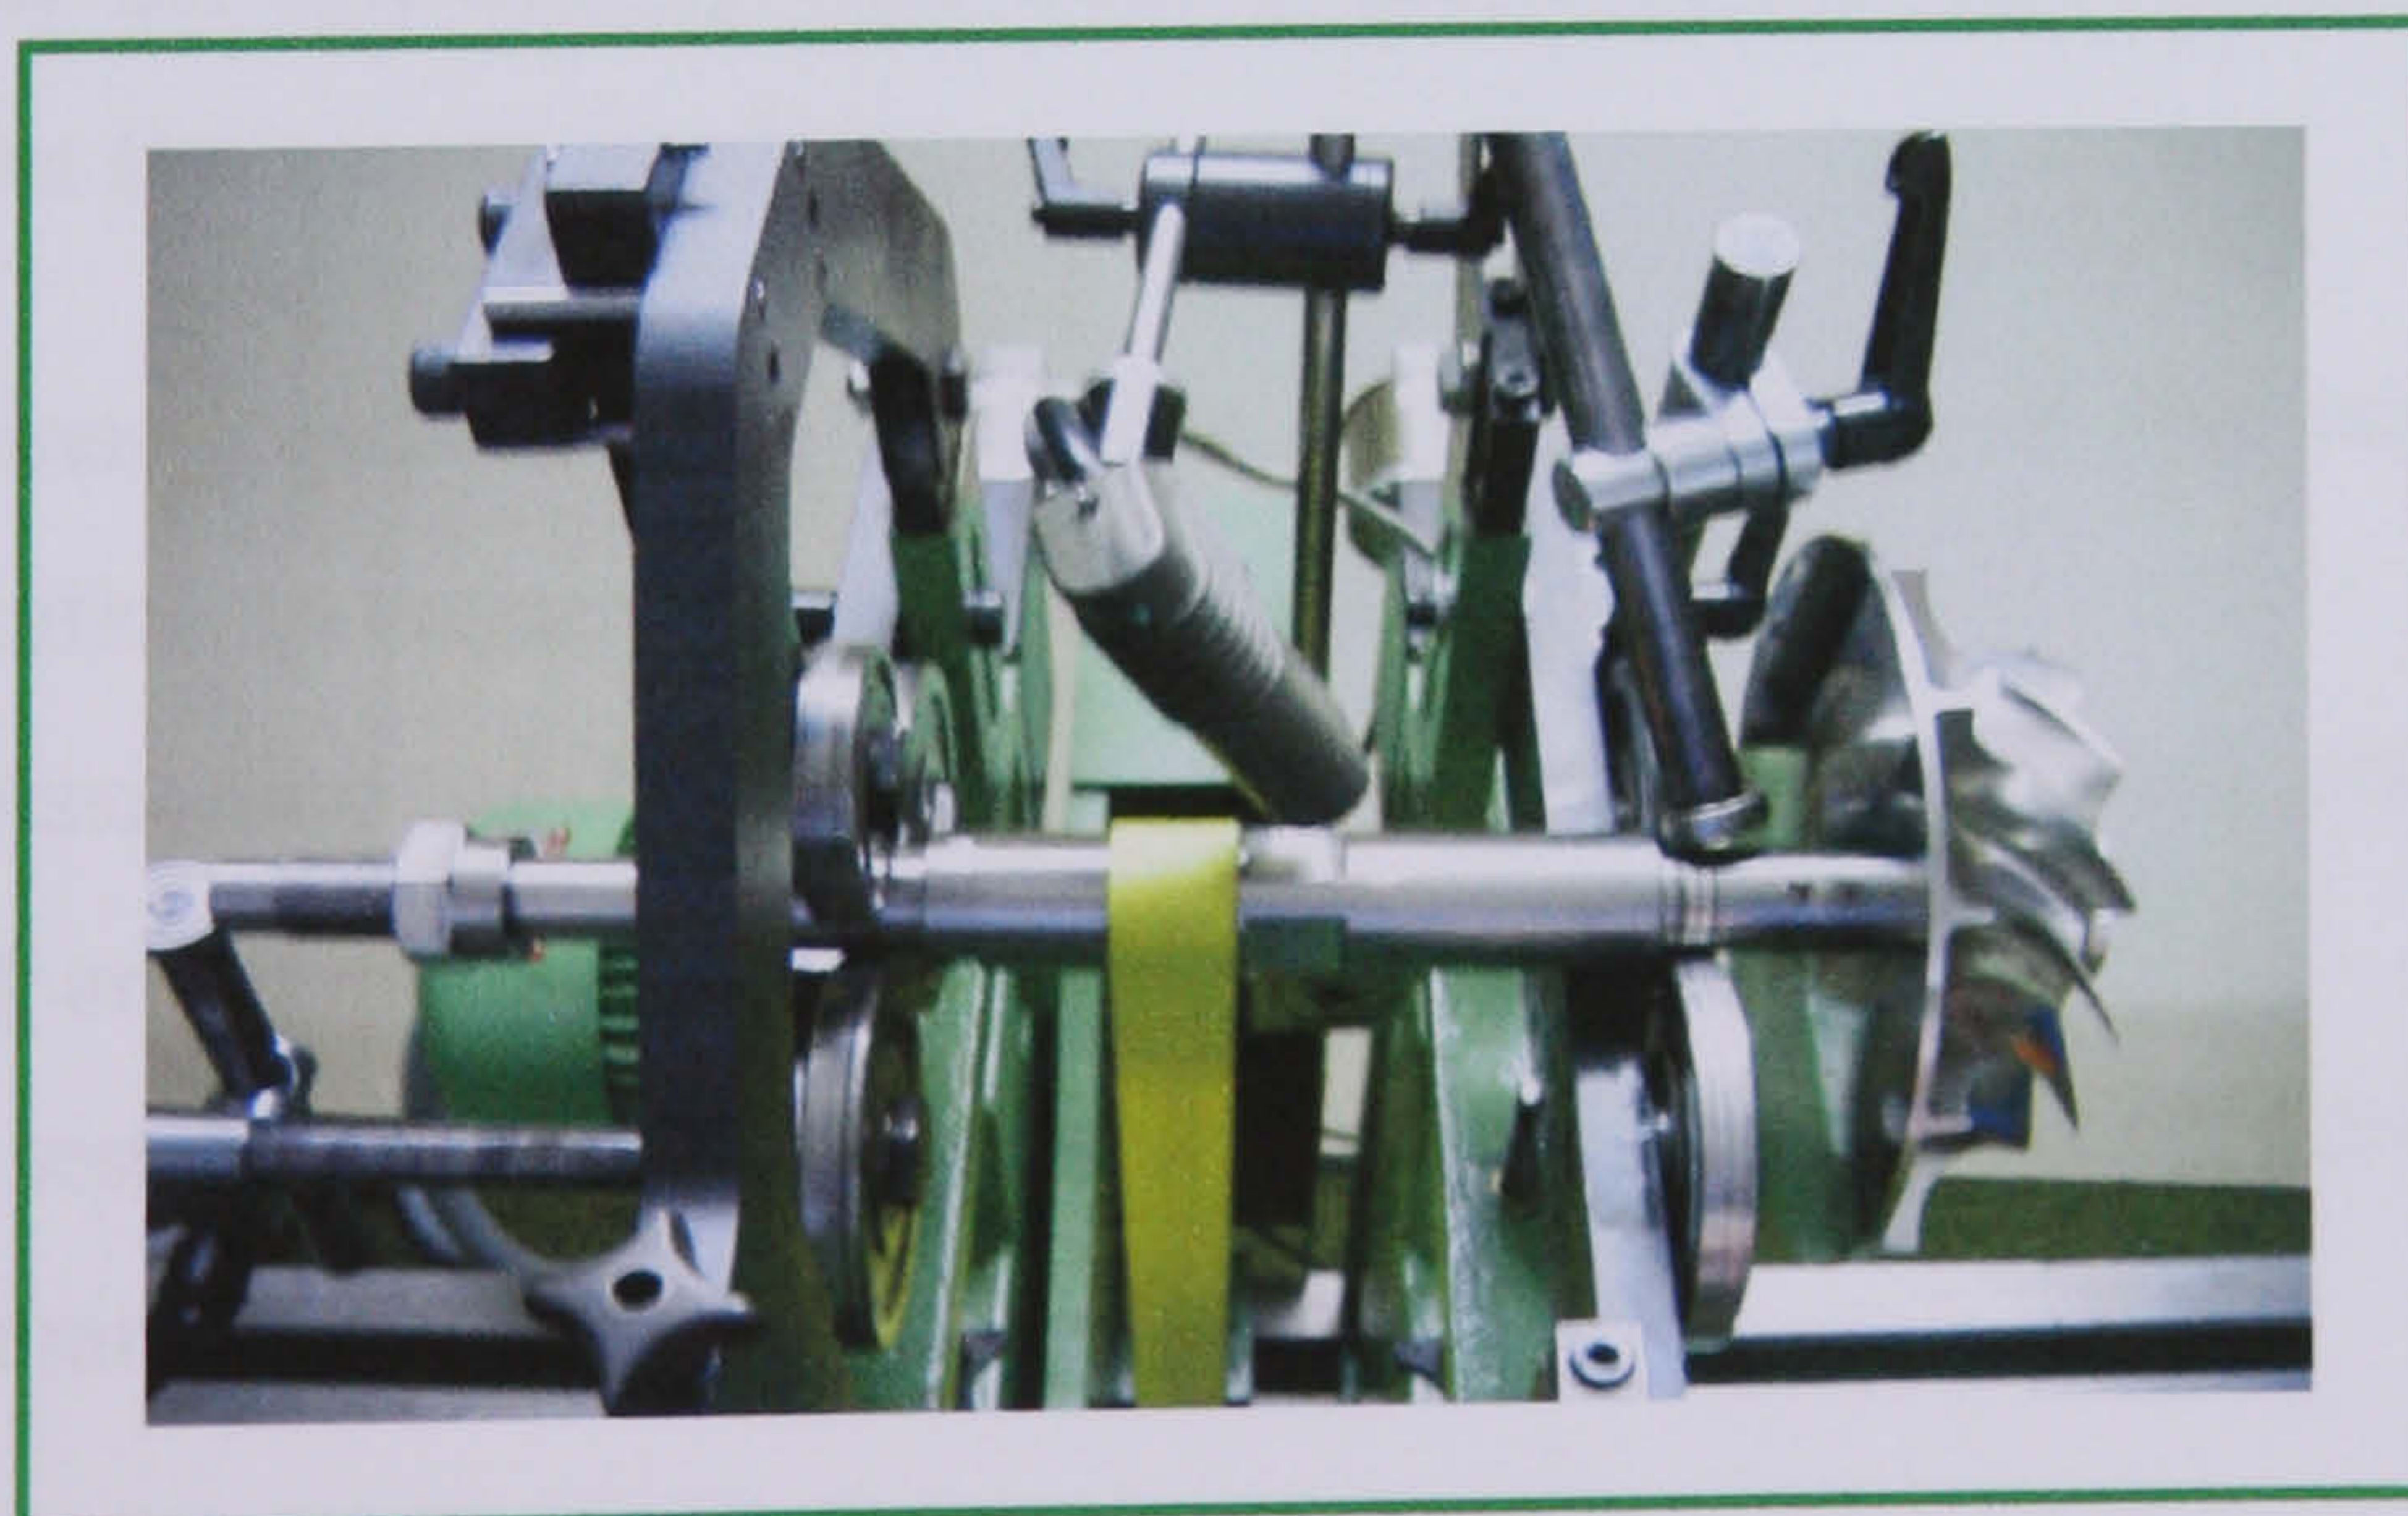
BALANCING SETUP OF THE TURBINE ROTOR
